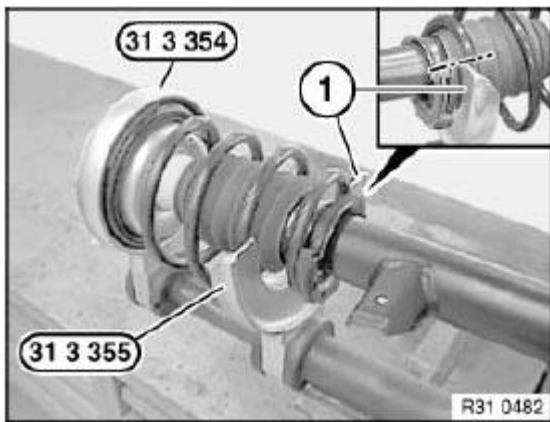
Identifying Special Tool (31 3 355) And (31 3 354)
